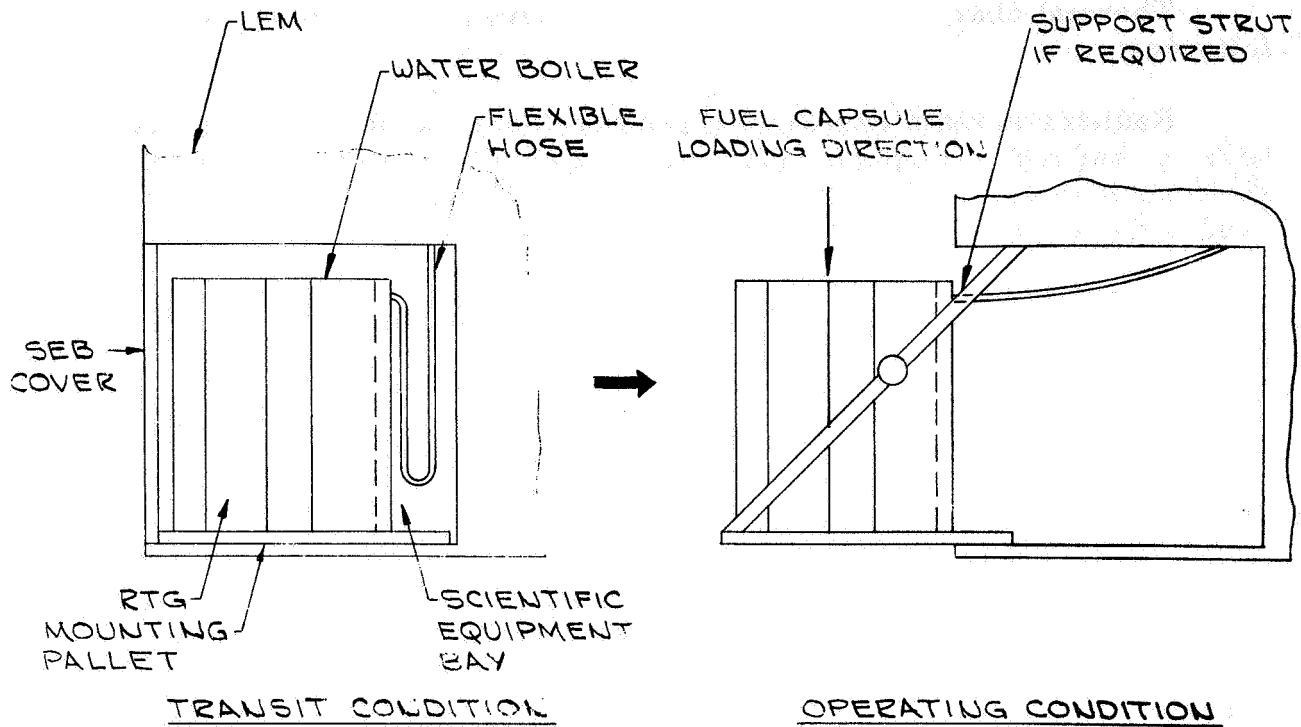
Electrical Power Generating Assembly Mounting Approaches, LM Vehicle
